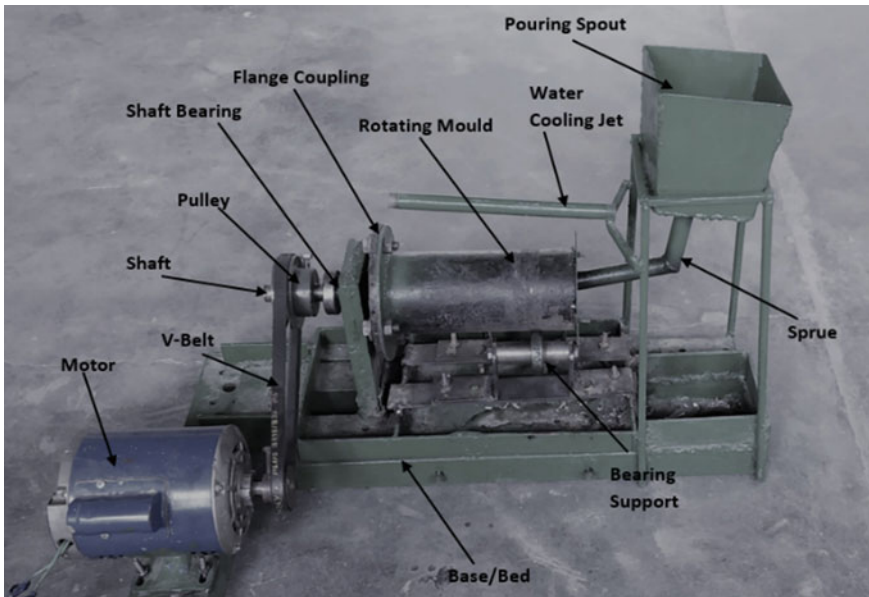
Fabricated horizontal centrifugal casting machine
